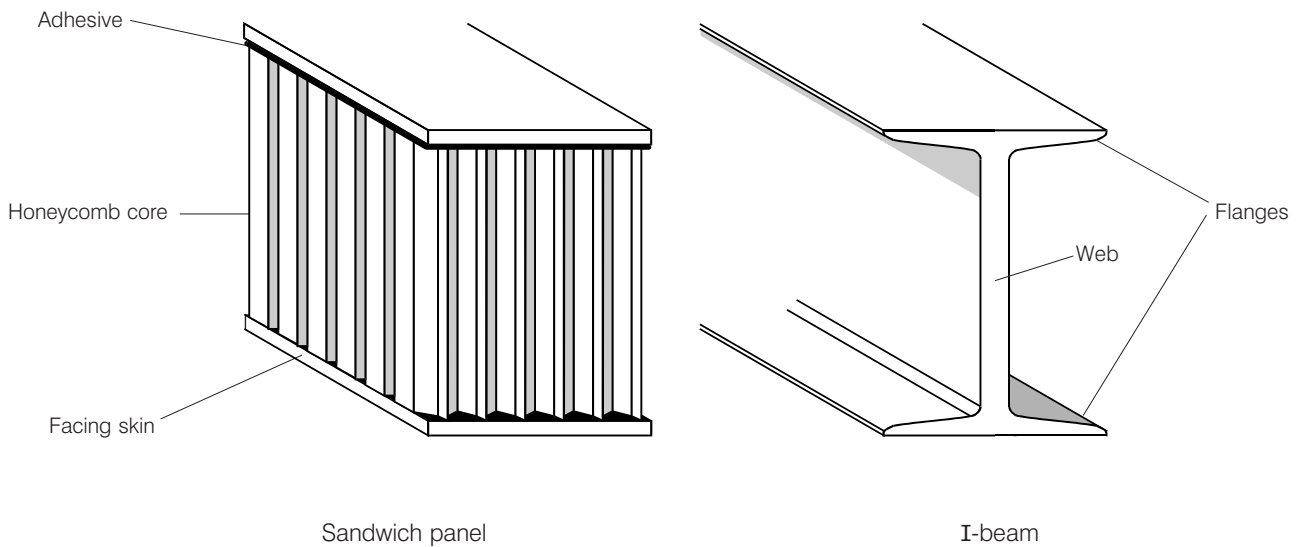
shows the construction of a sandwich panel compared to an I beam.
